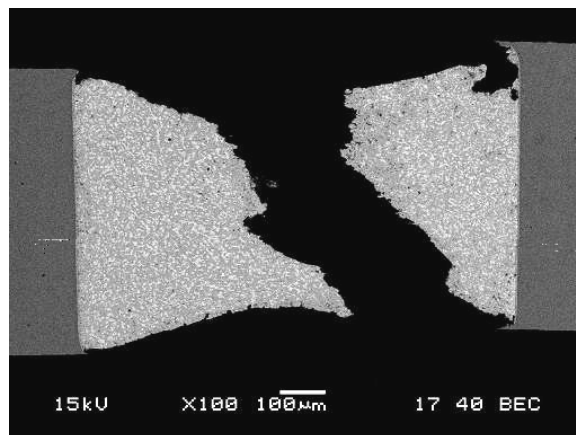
Fracture in the Ni-P/Sn-37Pb solder joint aged at 160 °C for 100 h with 1×10^3 A/cm² current density, showing ductile failure inside the bulk solder.
